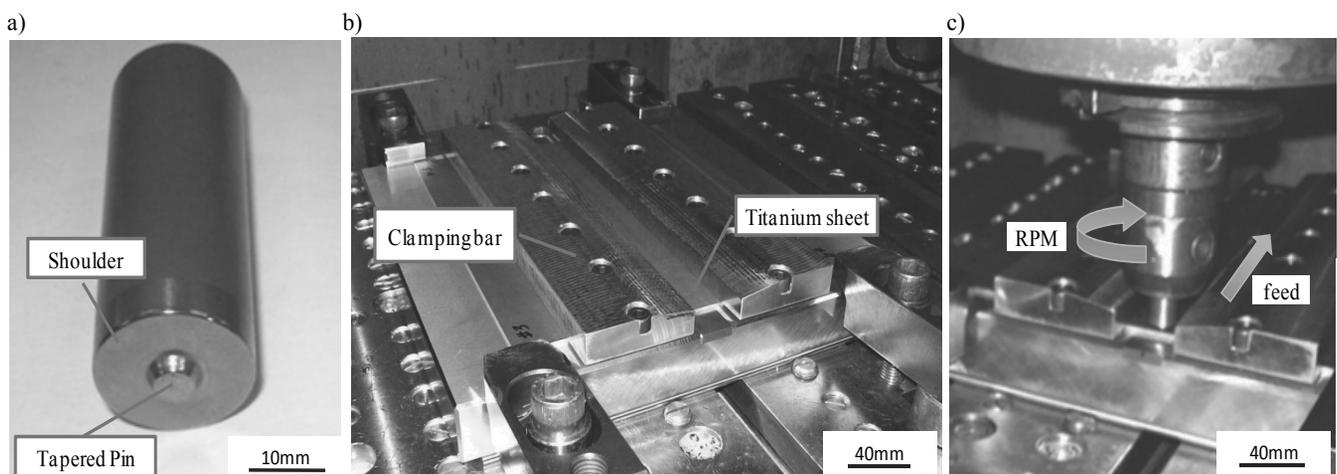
(a) Tool design showing the pin and shoulder features, (b) fixture device used for the experiment and (c) the tool fixed in the machine spinning and advancing on the titanium sheet
